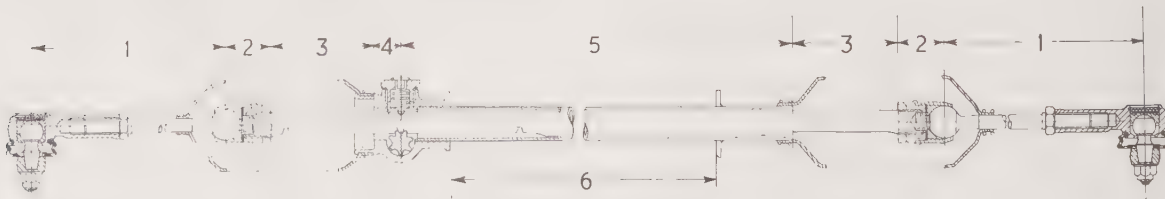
6 Correct dimensions for steering tie-rod assembly.
